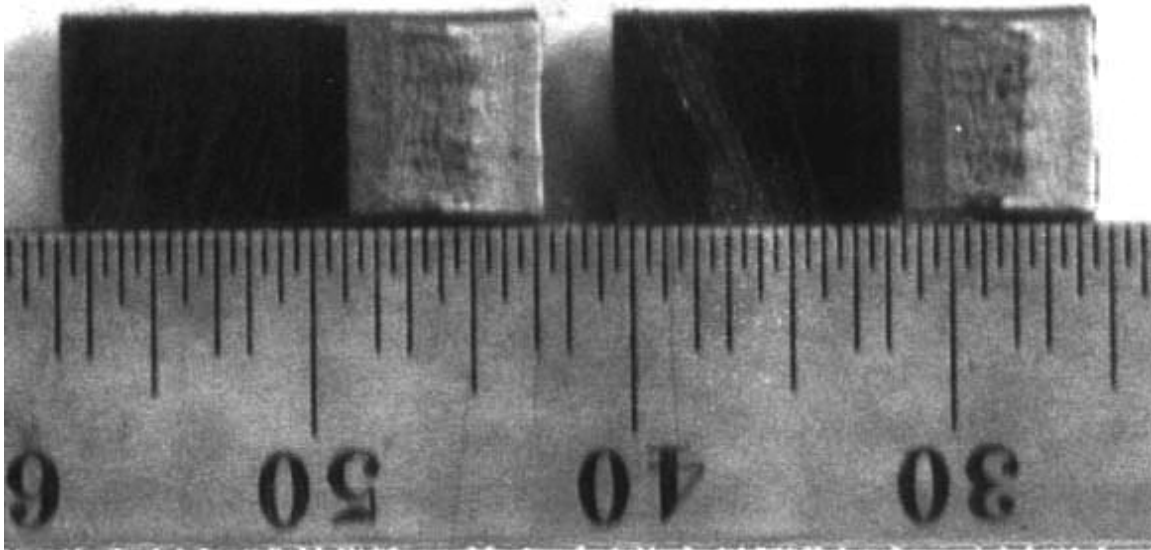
Fracture surface of specimen L20-A tested at 288°C
